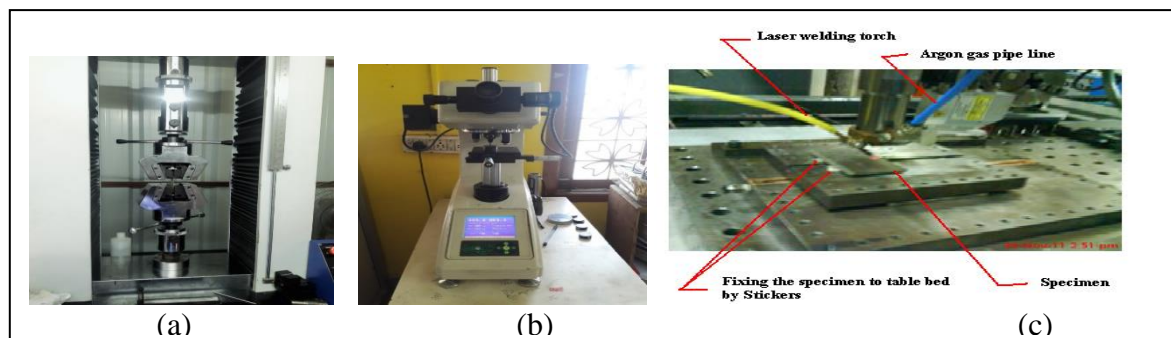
(a) Computer controlled UTM, (b) Micro Vickers hardness testing machine, and (c) Laser welding set up.
